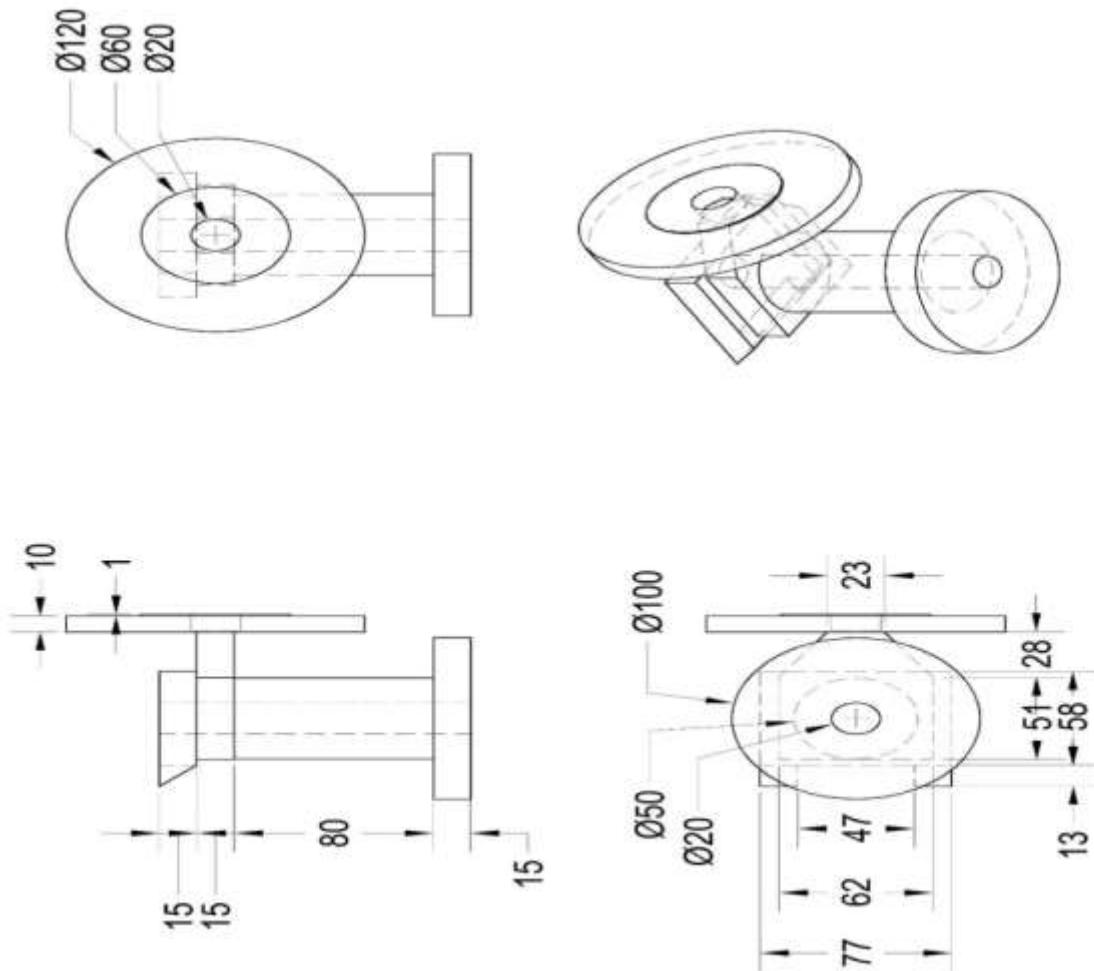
Drafting drawing of safety valve with dimension on different views (all are in mm)
